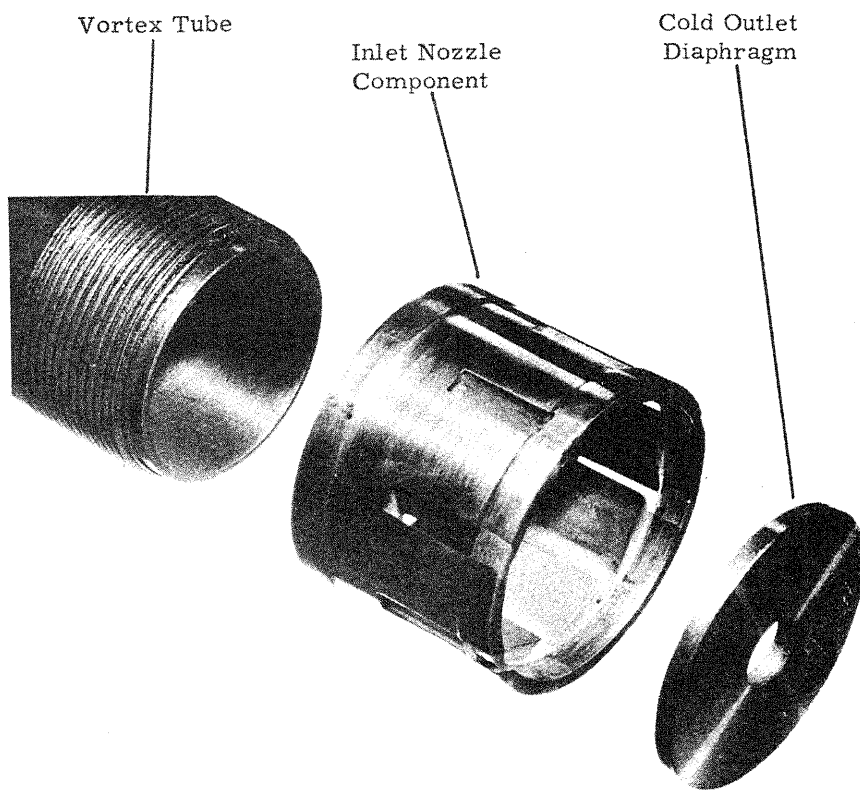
EXPLODED VIEW OF COLD OUTLET DIAPHRAGM,
